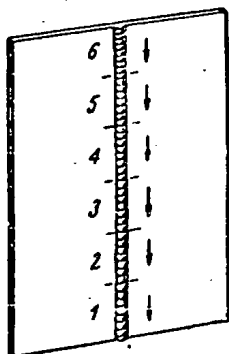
Reverse-stepped method of welding long sheets.
